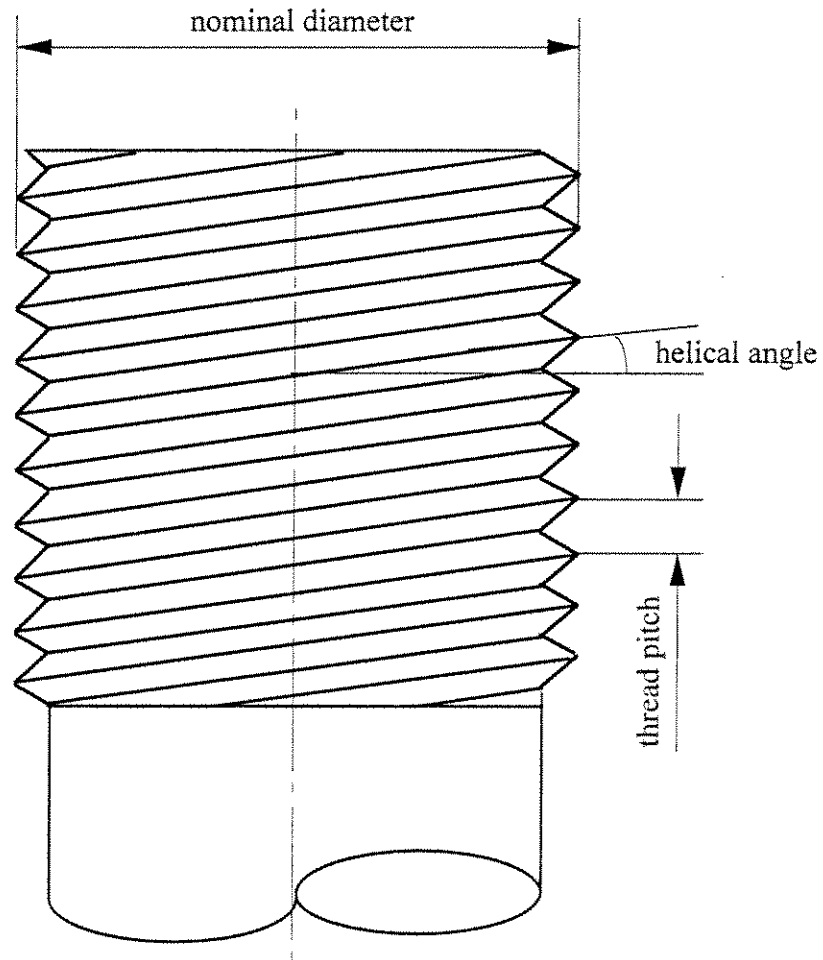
Geometric Parameters of Threads in a Threaded Composite Joint
